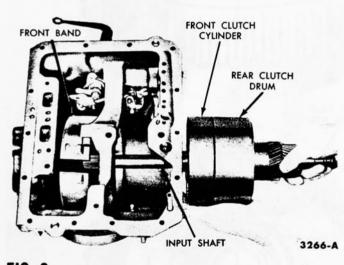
Input Shaft and Clutch Installation or Removal—PBL Transmission
